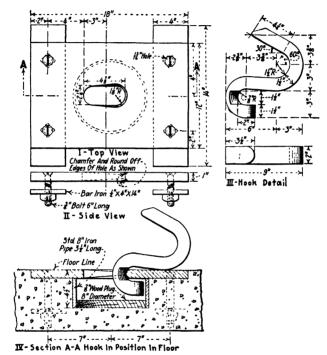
Attachment-socket floor plate and hook, to be set in electric station floors. (Walter H. Millan, Electrical World, Feb. 5, 1921.)
